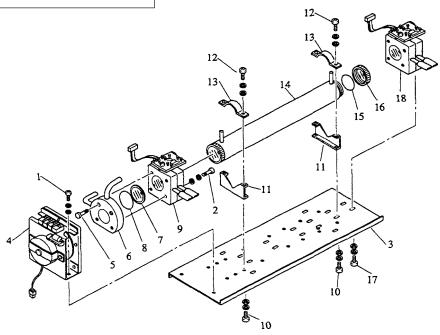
Exploded view of measuring unit (Combination cell)
